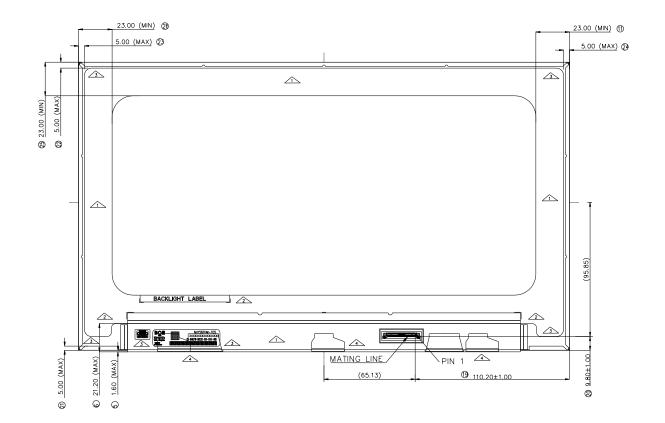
TFT-LCD Module Outline Dimensions (Rear view)
